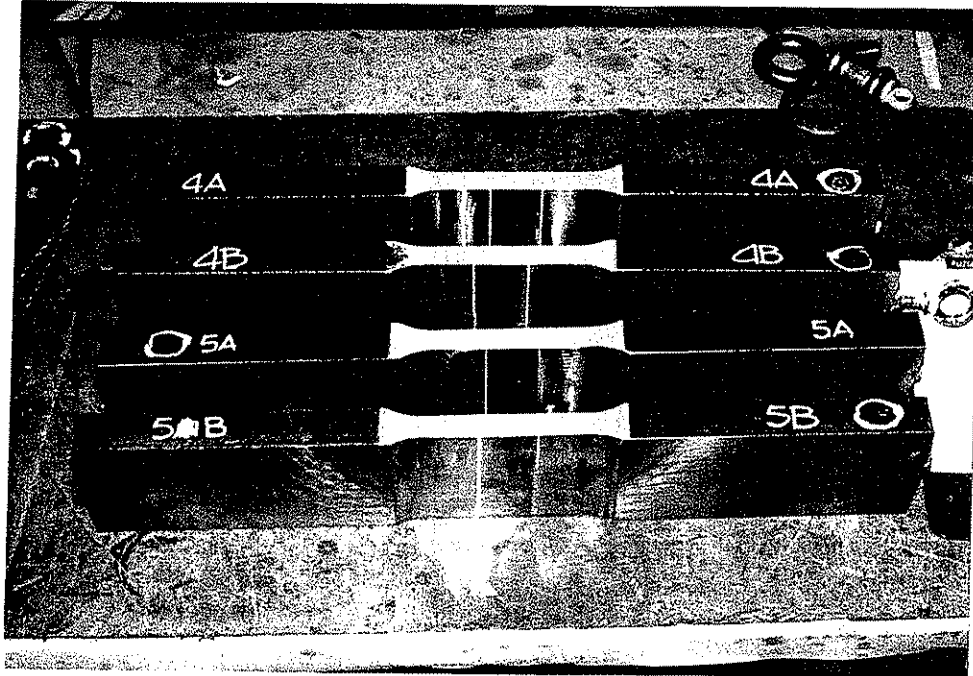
Full Flange Thickness (5 in.) Tensile Specimens
